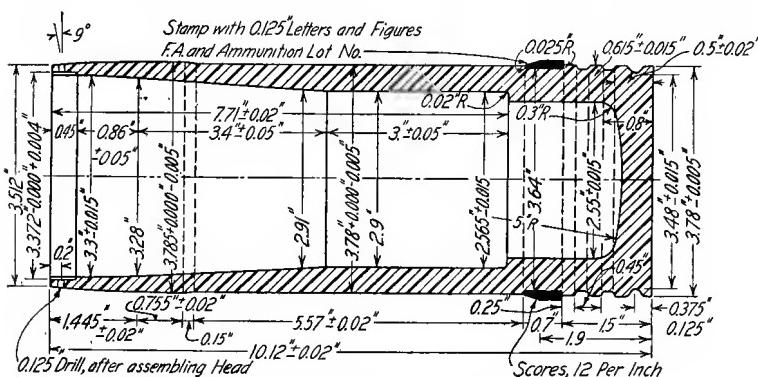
Limit dimensioning (from shrapnel drawing).
